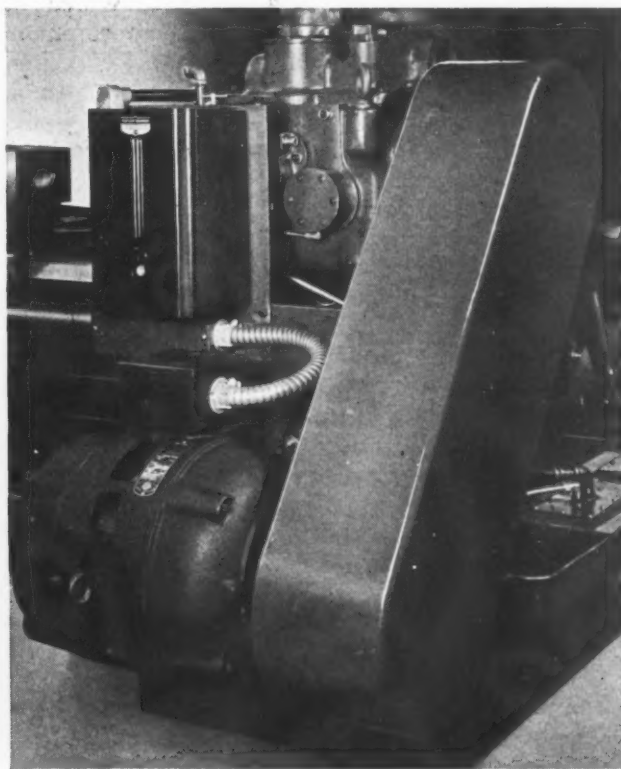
Completely Welded Belt Guard Shown in Fig. 8, Fitted to the Machine
